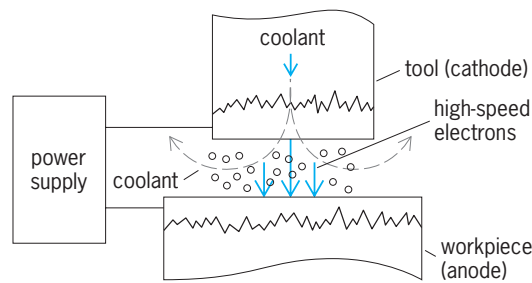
Electric-discharge, or electric-spark, machining process. (Elox Corporation of Michigan)
